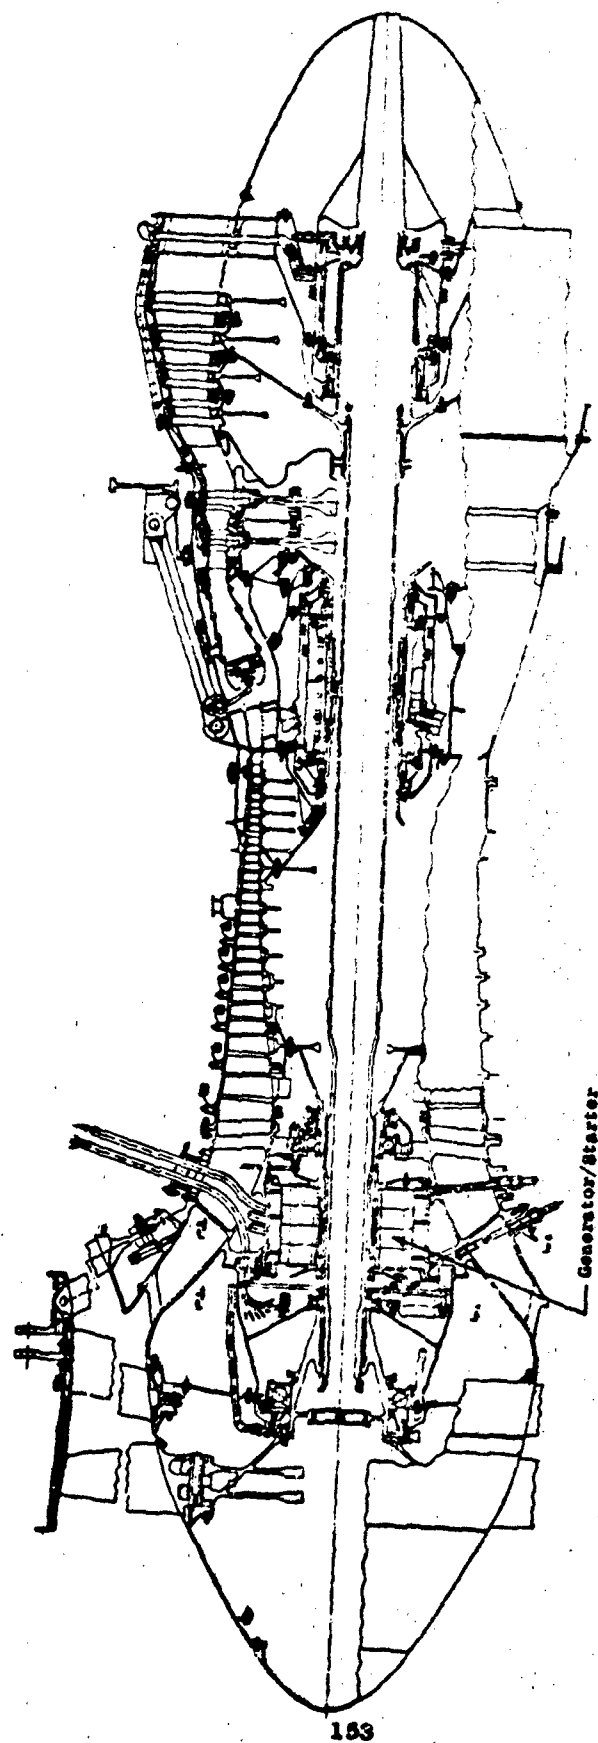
120 KVA/TF34 Shaft-Mounted Permanent Magnet Machine.
